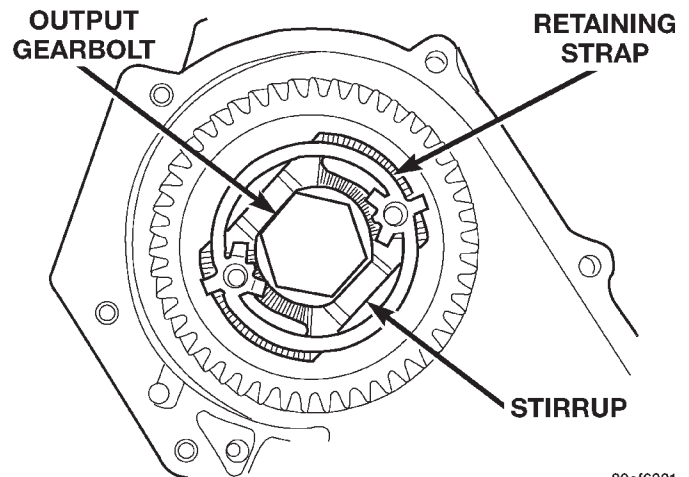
Stirrup Strap (Align Strap Holes With Tapped Gear Holes)
